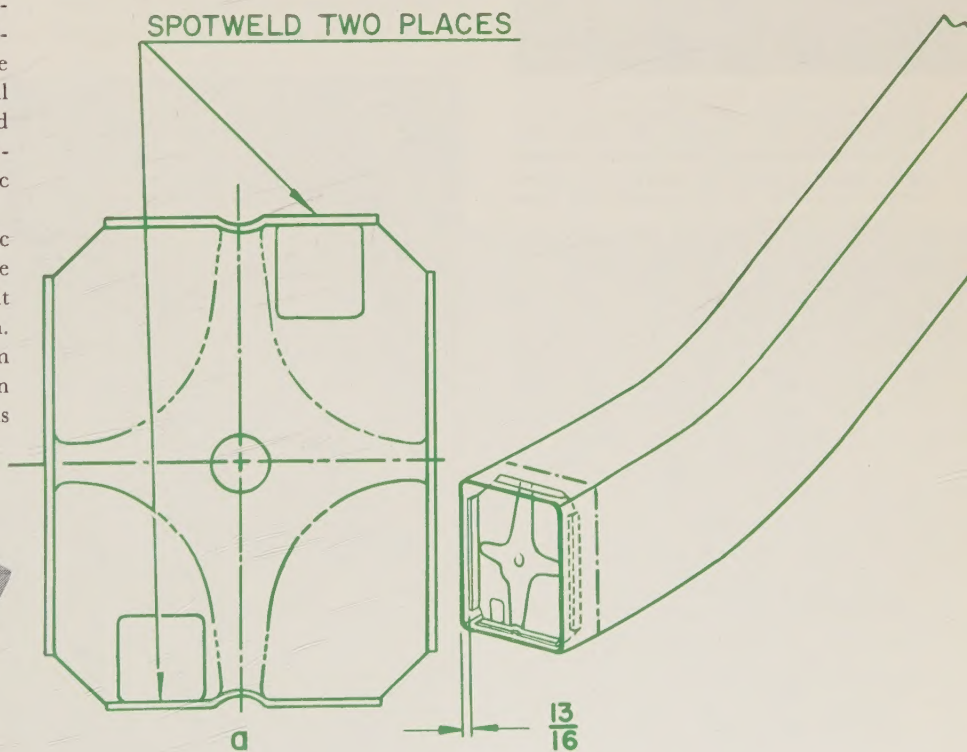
A spacer (a) is inserted in the mating end of each front, center, and rear section of the frame side rail prior to their being resistance flash welded together to insure that the shape of each section's side walls will be retained. The spacer is inserted $\frac{13}{16}$ of an inch from the end of each section and is spot welded in place. Shown in the upper view is a spacer as inserted in the rear end of the front section.
